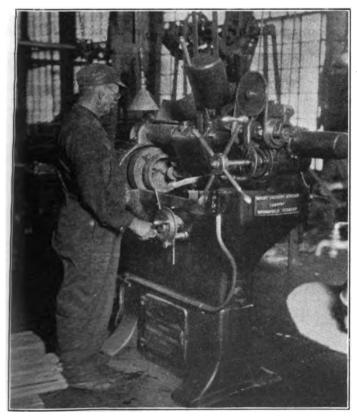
Grinding a 2½-in. by 3-in. Motion Work Bushing on a Bryant Chucking Machine
